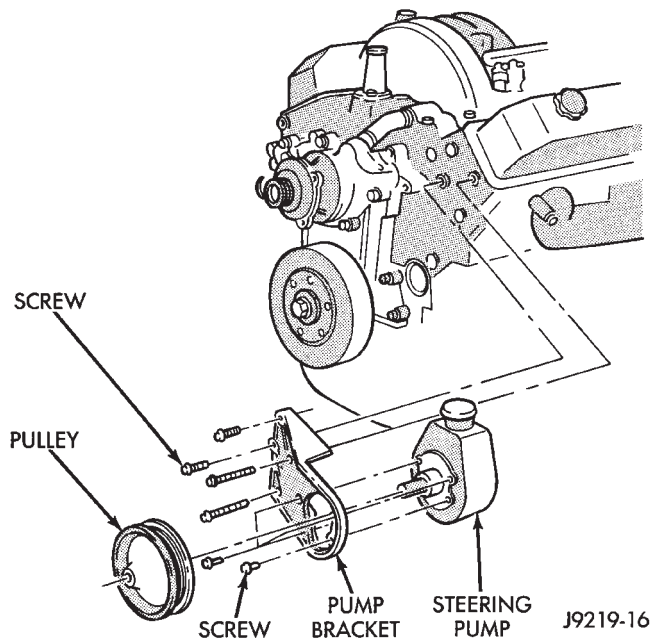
Pump Mounting 3.9L, 5.2L and 5.9L
